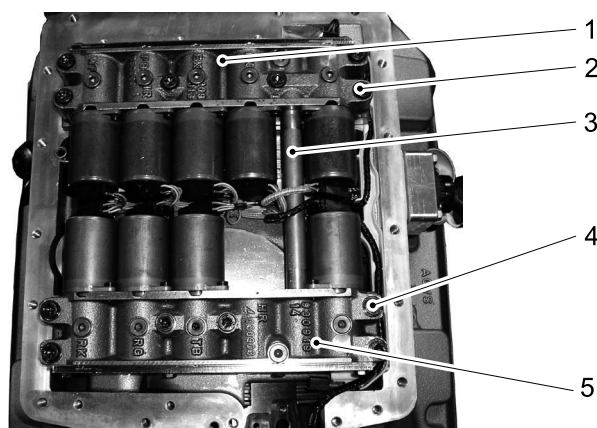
1 – Control block; 2 – Screws; 3 – Connecting tube; 4 – Control block
